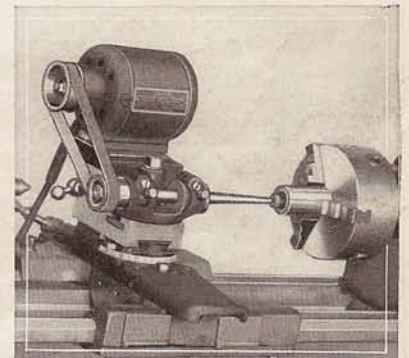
Finishing the Inside Diameter of Hardened Steel Bushings by Grinding
